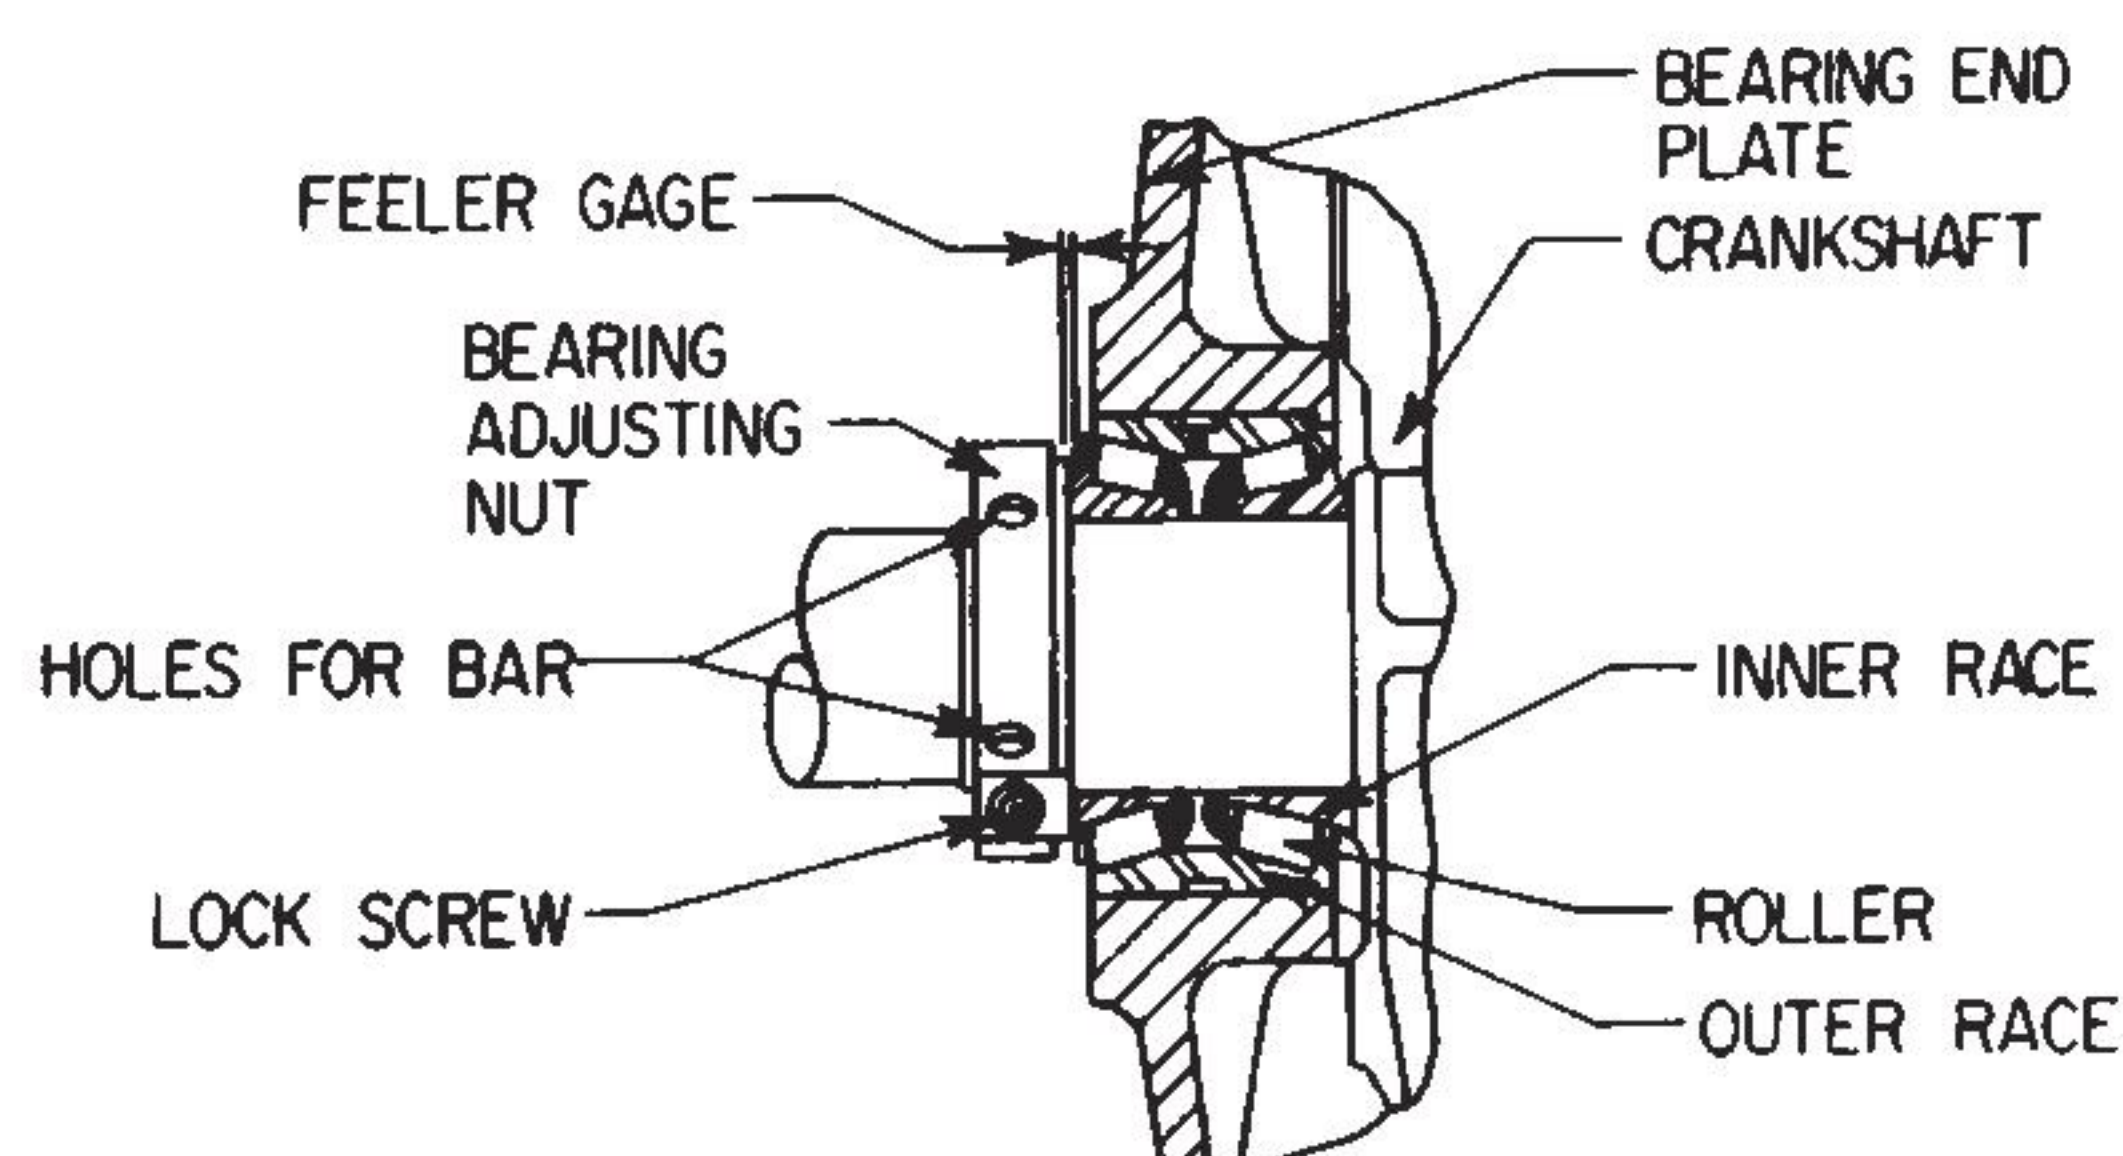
Crankshaft main-bearing adjustment for double-row tapered roller bearings.
